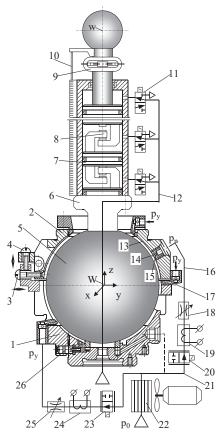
Design scheme of adjustable aerostatic and hydrostatic spherical support with a drive to change the rod length: 1 — casing; 2 — lid; 3, 4 — screw drives; 5 — precise spherical surface; 6 — manipulator rod; 7 — pistons; 8 — detent; 9 — micro-displacement device; 10 — meter; 11 — adjustable throttles; 12 — tubing; 13 — pockets; 14 — throttle; 15 — support units; 16 — tubing; 17 — nozzle; 18 — throttle; 19 — heater; 20 — distributor; 21 — tubing; 22 — radiator; 23 — distributor; 24 — heater; 25 — adjustable throttle
